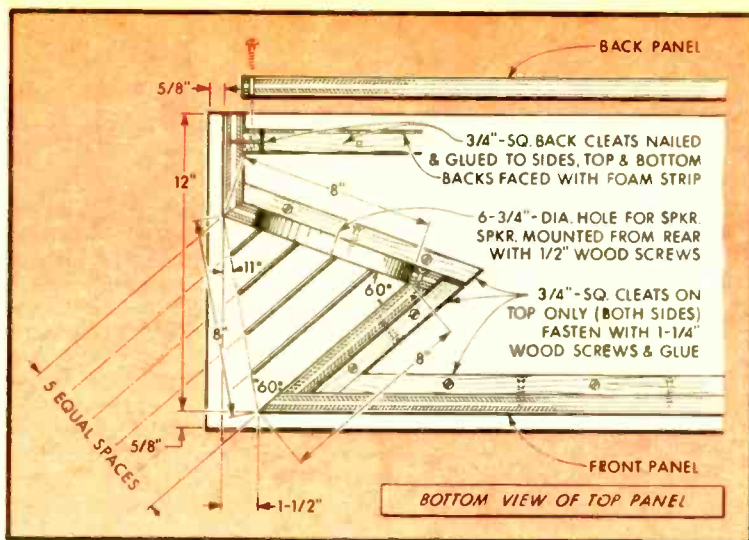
Diagram of one corner shows construction details for positioning vanes and speaker mounting board. Spacing between vanes is about 1½ in. It may vary slightly, depending on construction, but should be same between vanes.
